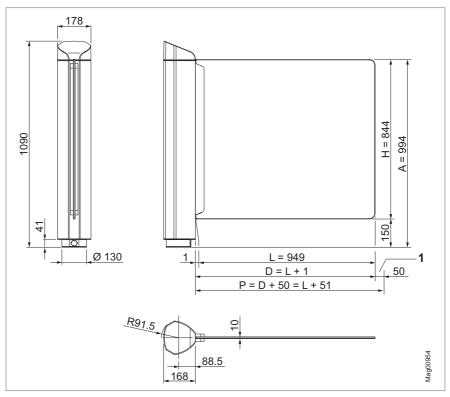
Dimensions mSwing with wing FMSW_MG (dimensions in mm)
